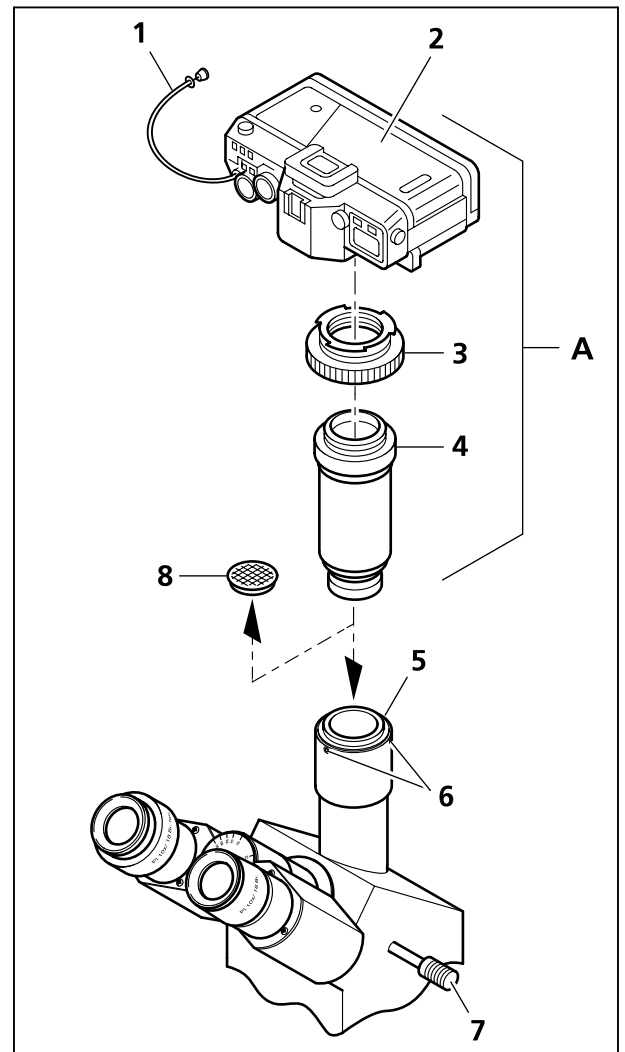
Attachment of SLR camera, e.g. CONTAX 167 MT
